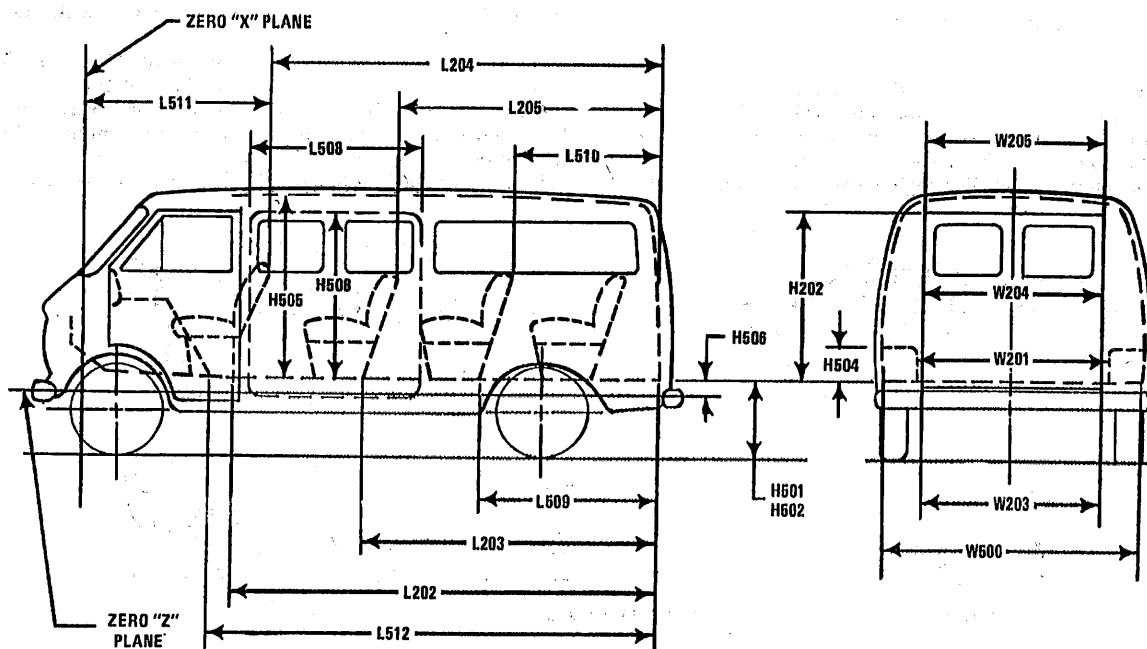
CARGO SPACE DIMENSIONS, TRUCK AND MPV WITH CLOSED CARGO AREA
